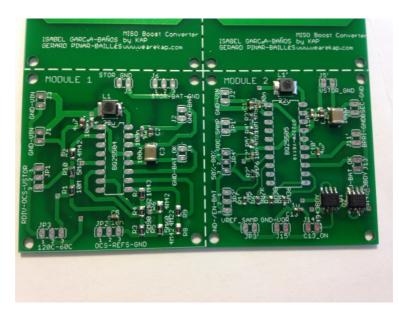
Soldering module 1 and 2 small components [Self-made]
